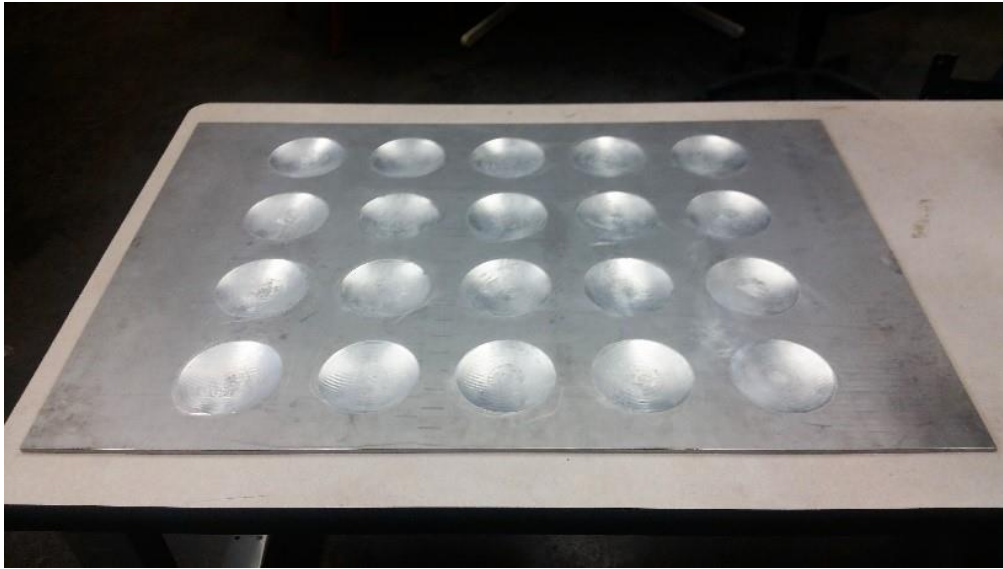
Grid of two-dimensional ABHs machined into an aluminum plate.
